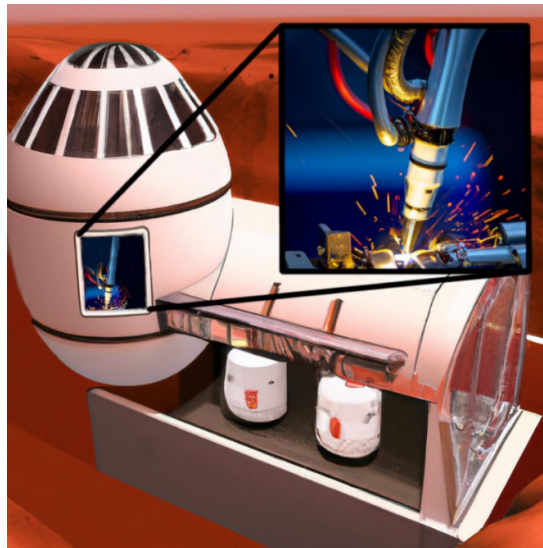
In-space manufacturing concept, with a close-up of an example welding process
